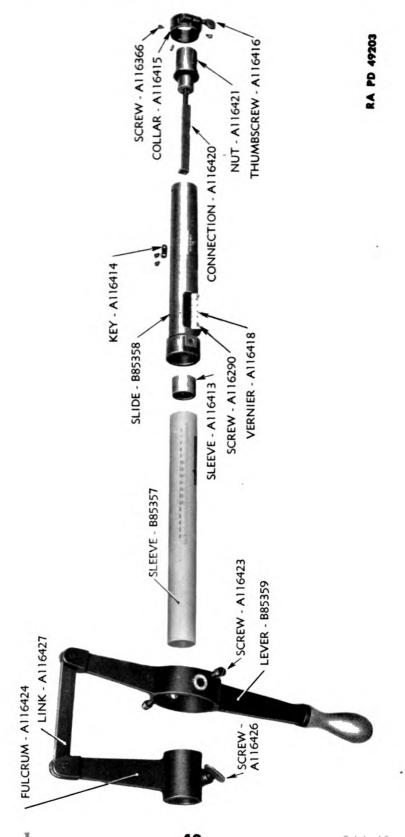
Exploded View of Handle, with Slide, Assembly (Front View, 5.75-inch Star Gage)
